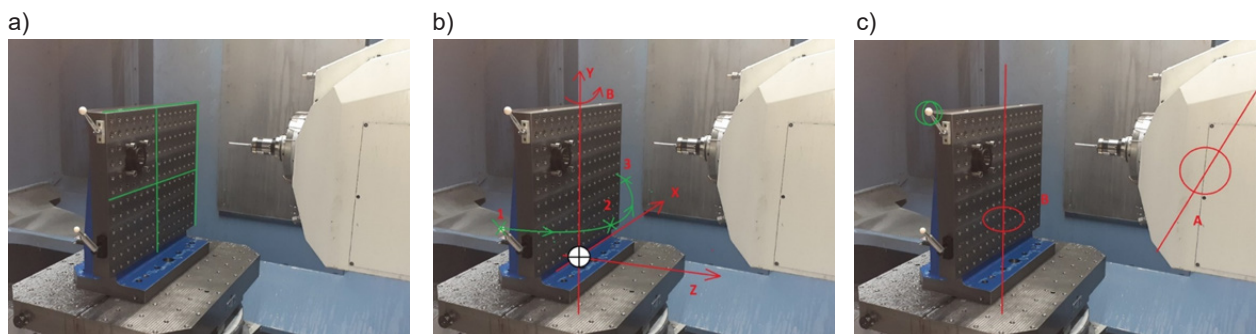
View of the calibration master (two reference sphere's, calibration column), together with the RMP600 probe, inside 5-axis machine center: a) geometry measurement, b) machine zero measurement, c) kinematic vectors test
